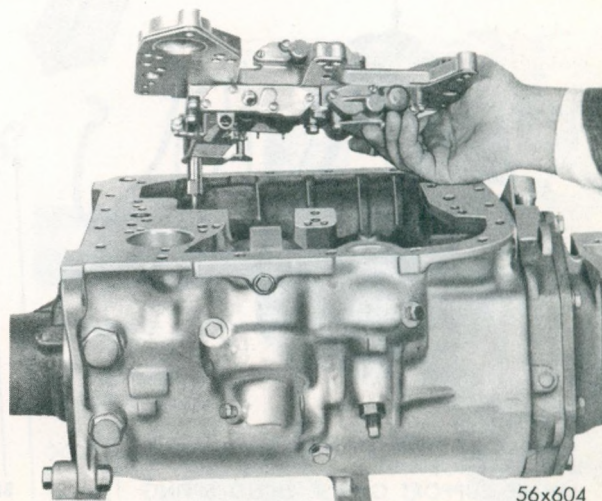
Removal and Installation of Valve Bodies and Transfer Plate Assembly (Typical View)
